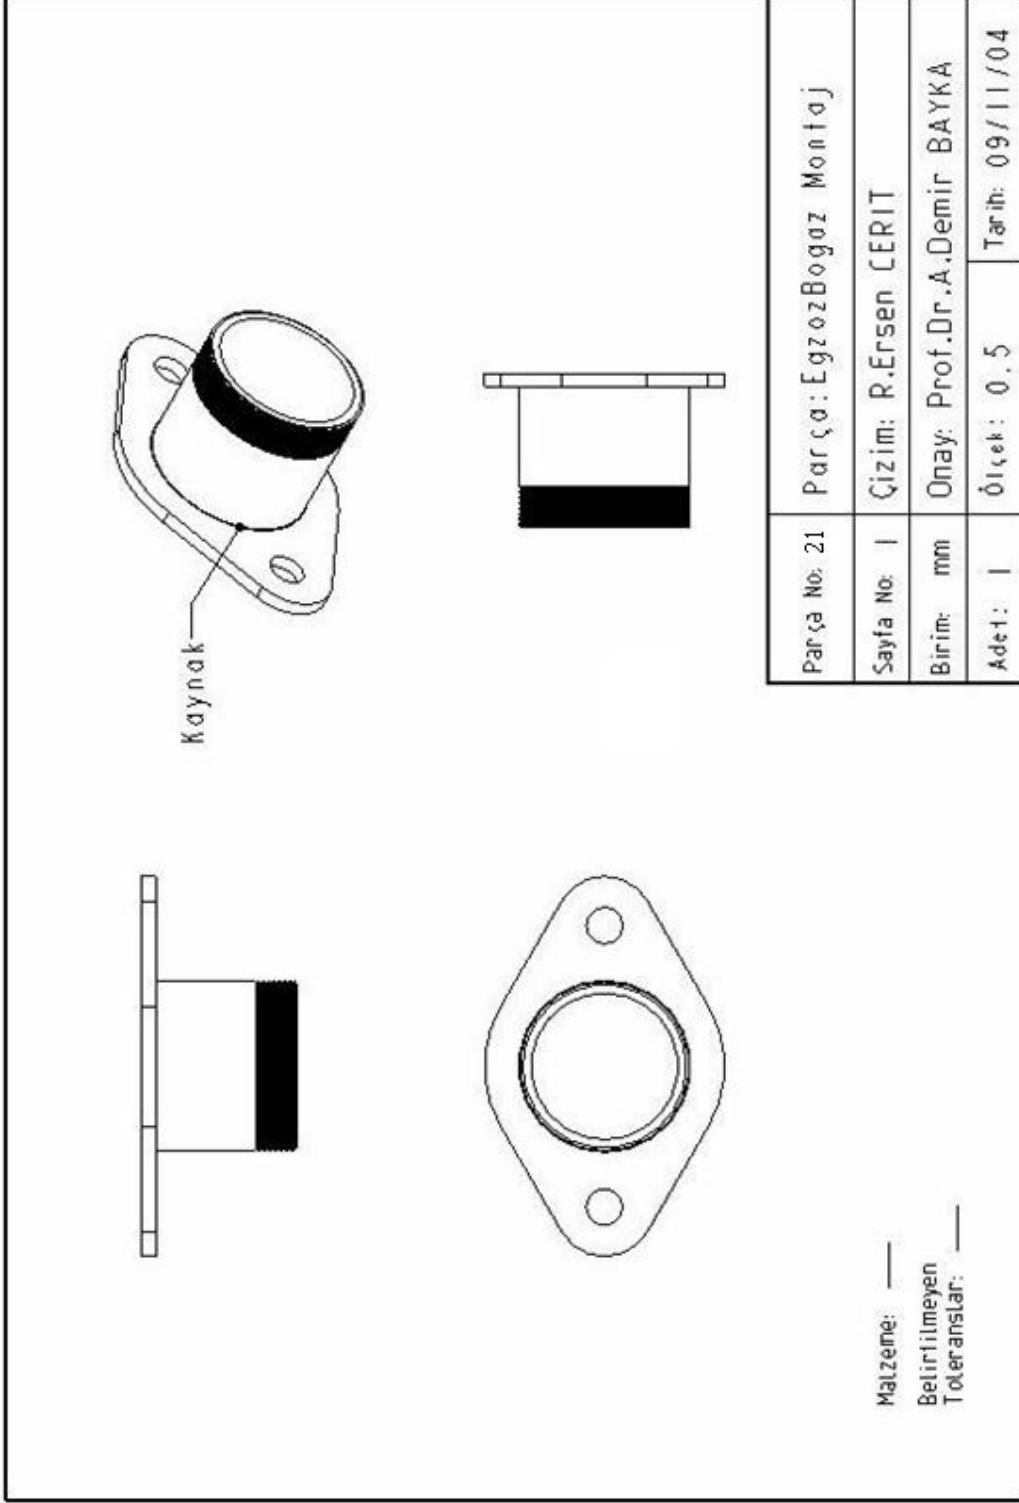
Technical Drawing of Exhaust Pipe Connection.
